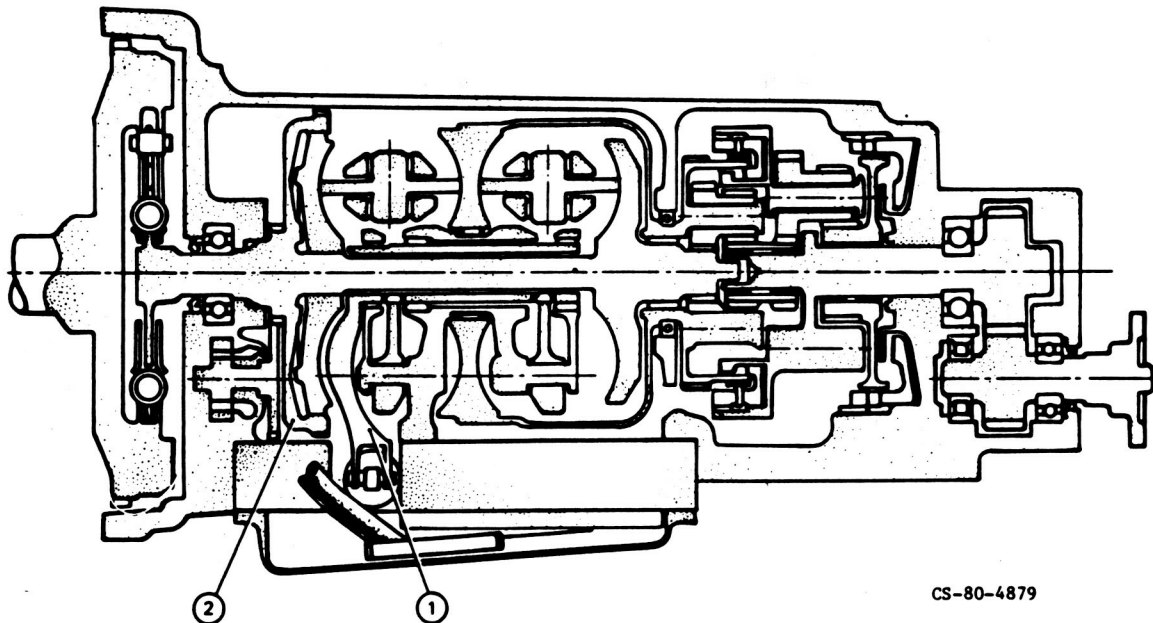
BL Technology/Perbury traction CVT, 60-kW passenger car test installation (ref. 90).
